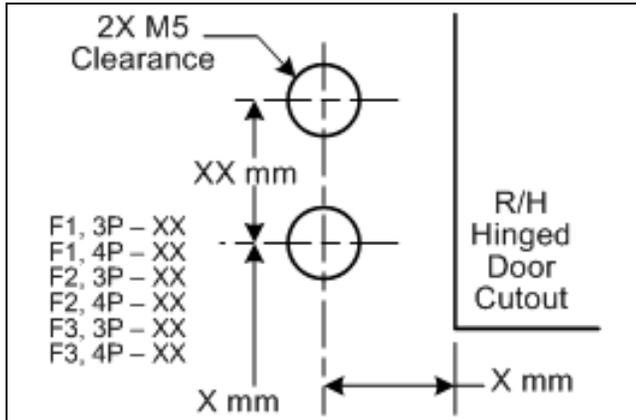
Right-Hand Hinged Board Door Bracket Location Detail
